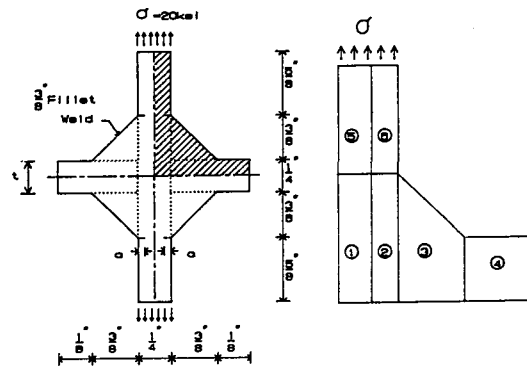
Stretched Plate with Fillet Welded Ribs (Weld Face - Flat)
